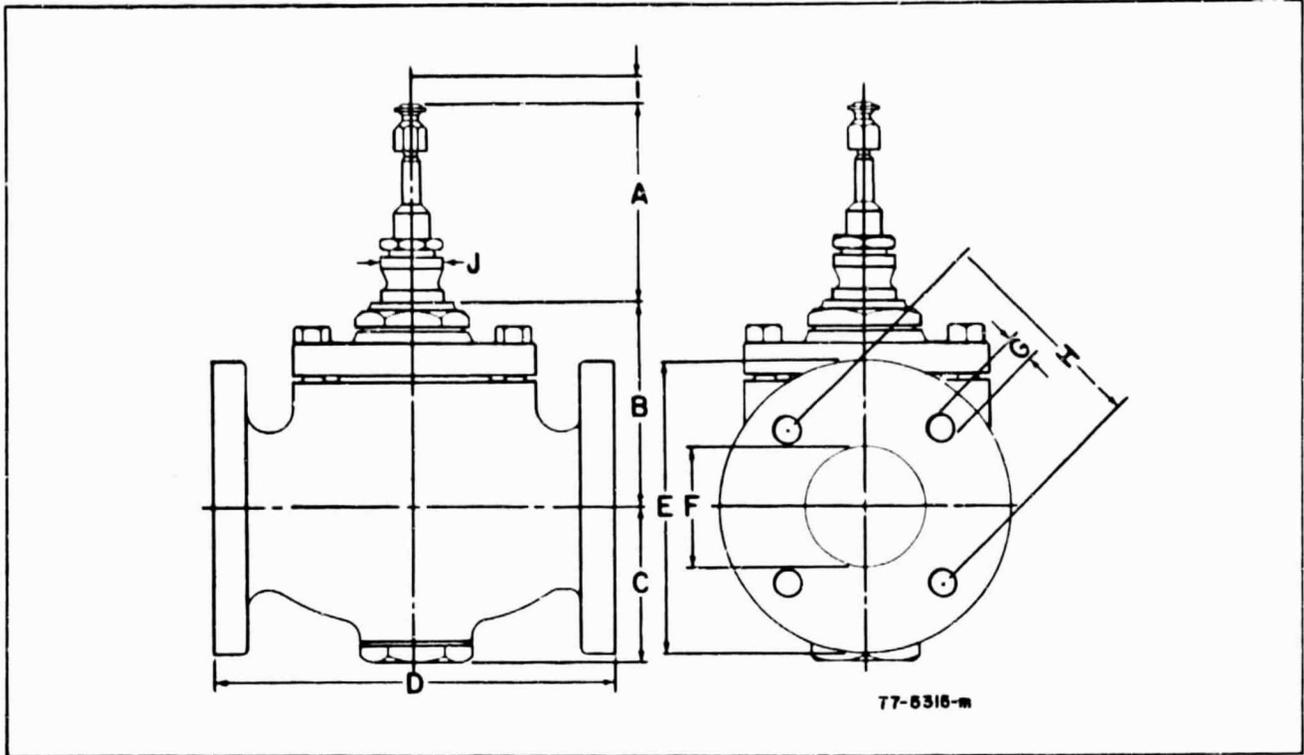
V5011A & D FLANGED BODY DIMENSIONS (REFER TO TABLES 5 AND 6)
